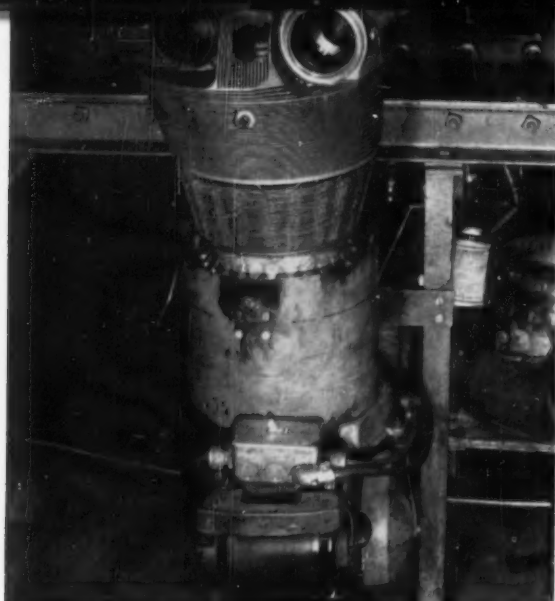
The cylinder-flange lapping machine. This semiautomatic device, designed and assembled by a shop mechanic, uses the cast-iron base and gear box from a washing machine. A lapping block is adapted to the agitator drive.
